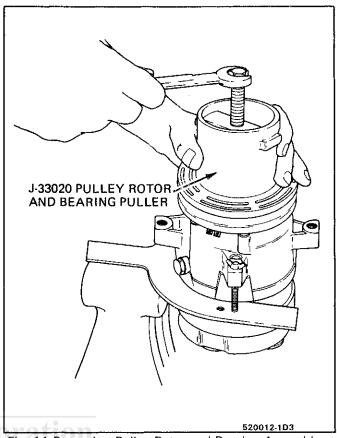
Removing Pulley Rotor and Bearing Assembly
